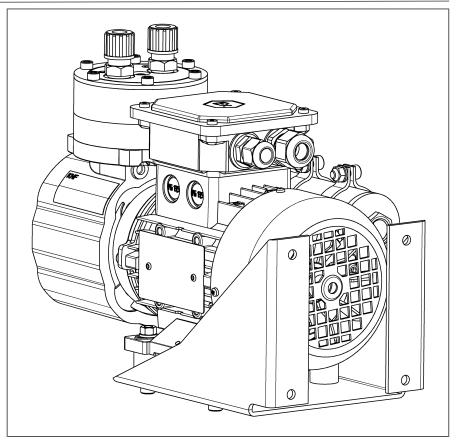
Pump with accessories (N922FTE pump illustrated with hose screw connection, mounting kit - anti-vibration buffers and mounting bracket)
